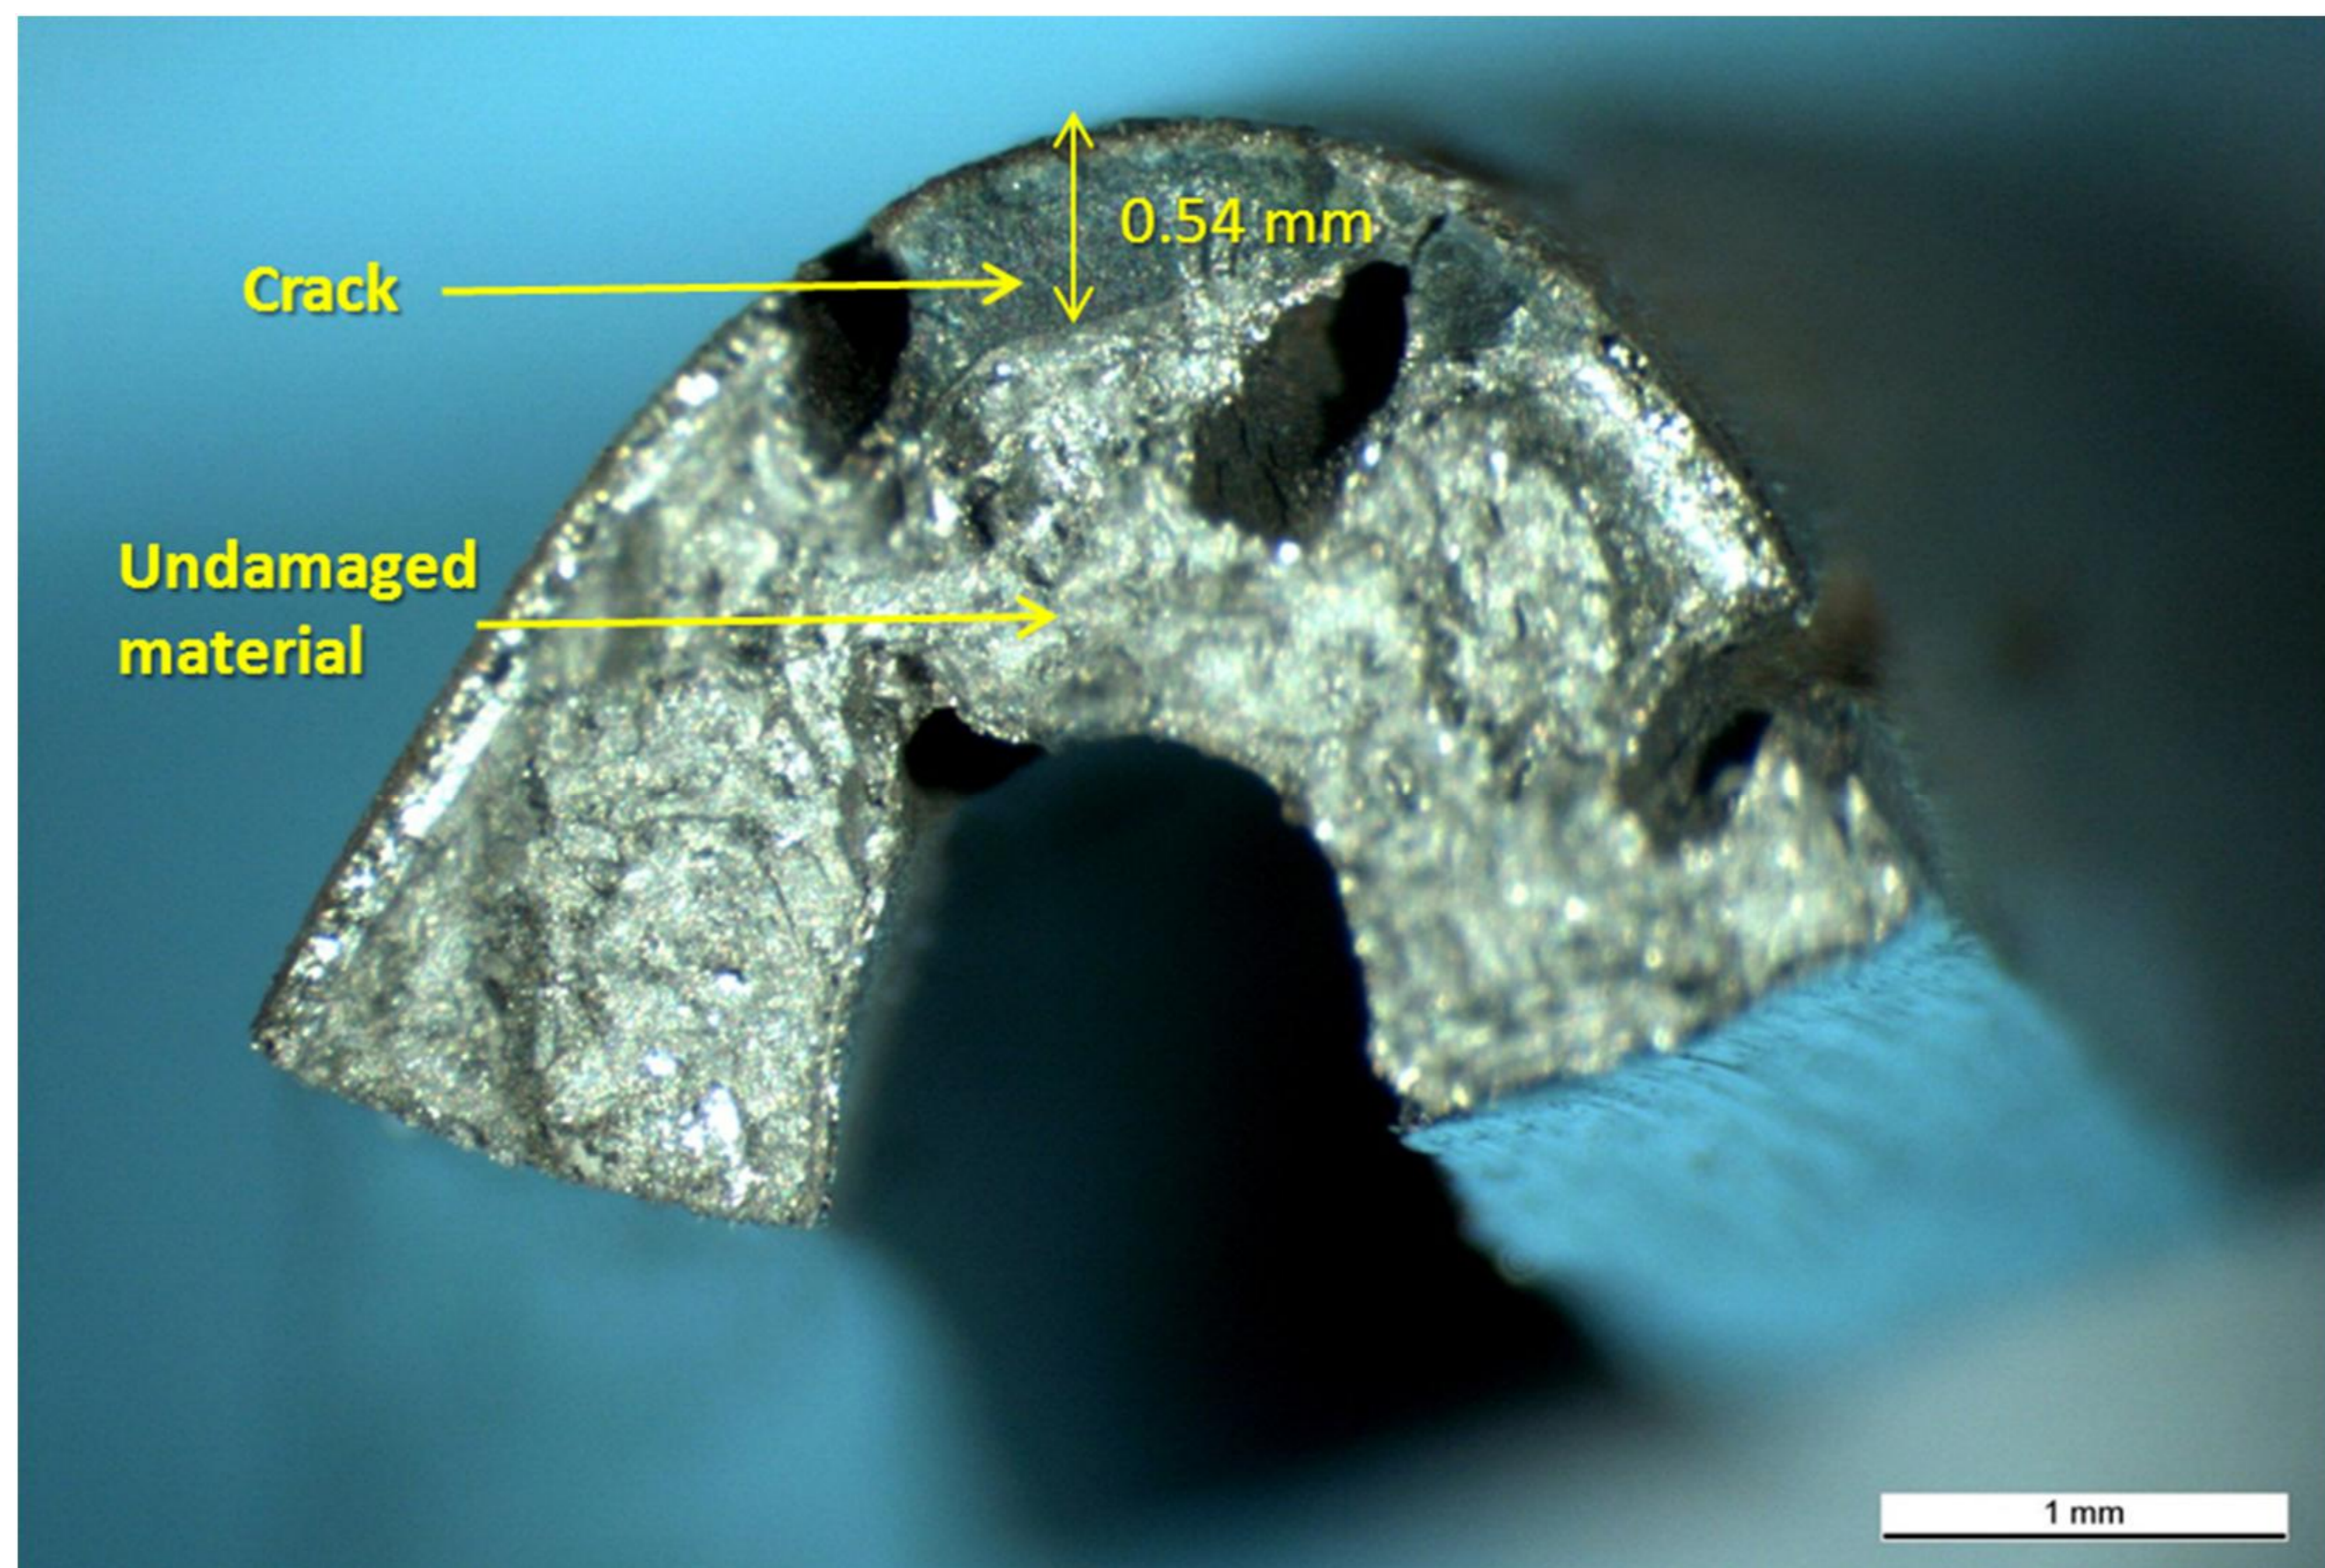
Opened crack from Fig. 35. Picture by courtesy of VTT.
